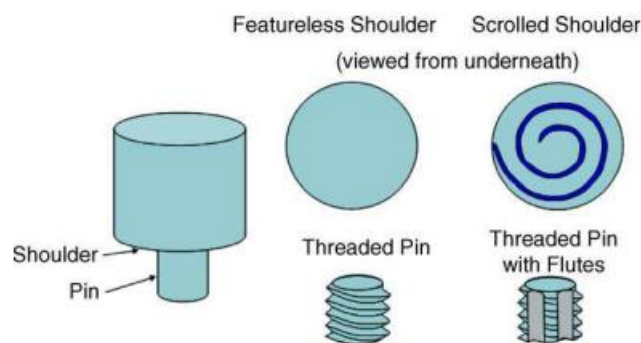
Schematic drawing of FSW Tool Geometry [2]
